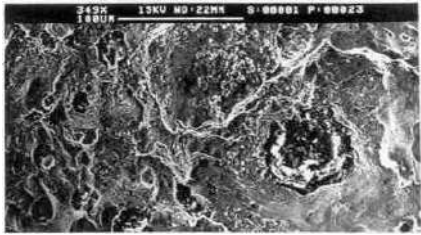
Fractograph of failed crankshaft shows a number of secondary cracks, porosities and nodule separation at the matrix interface (h & i).
